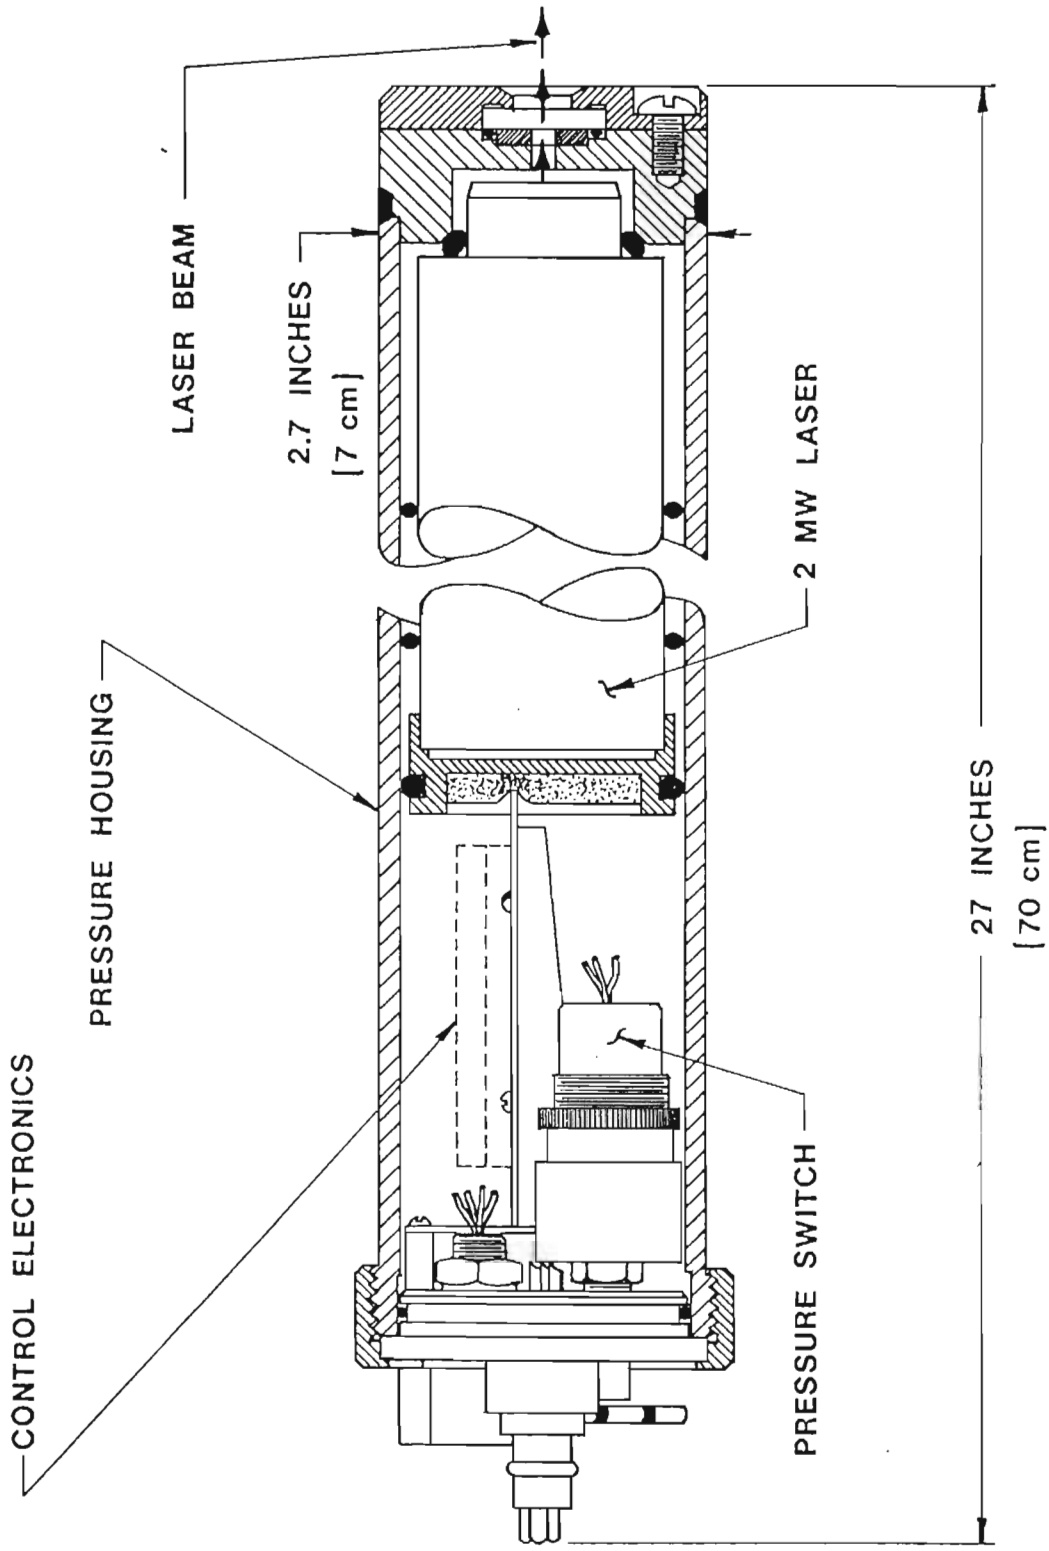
Mechanical Assembly, Underwater LASER Unit.
